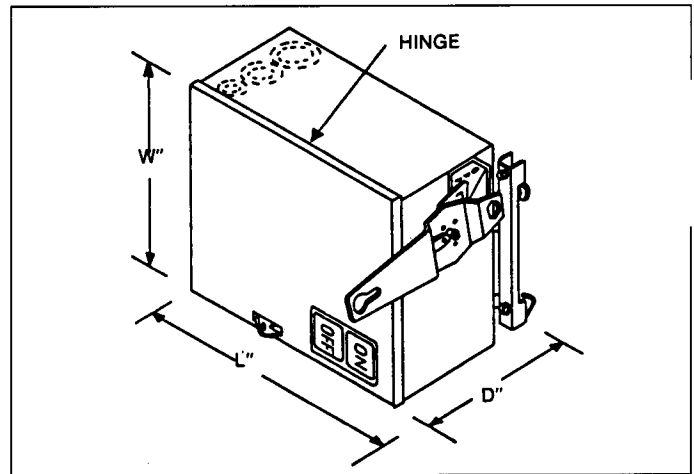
Door Hinges at Top. All Dimensions are Shown Over Largest Part of Plug.
